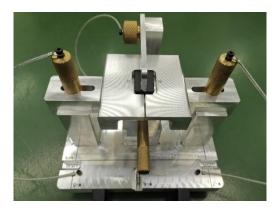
Checking Fixture for Cover, Spare Switch Hole
